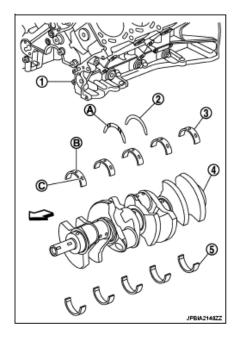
Identifying Cylinder Block And Thrust Bearings Courtesy of NISSAN MOTOR CO., U.S.A.
